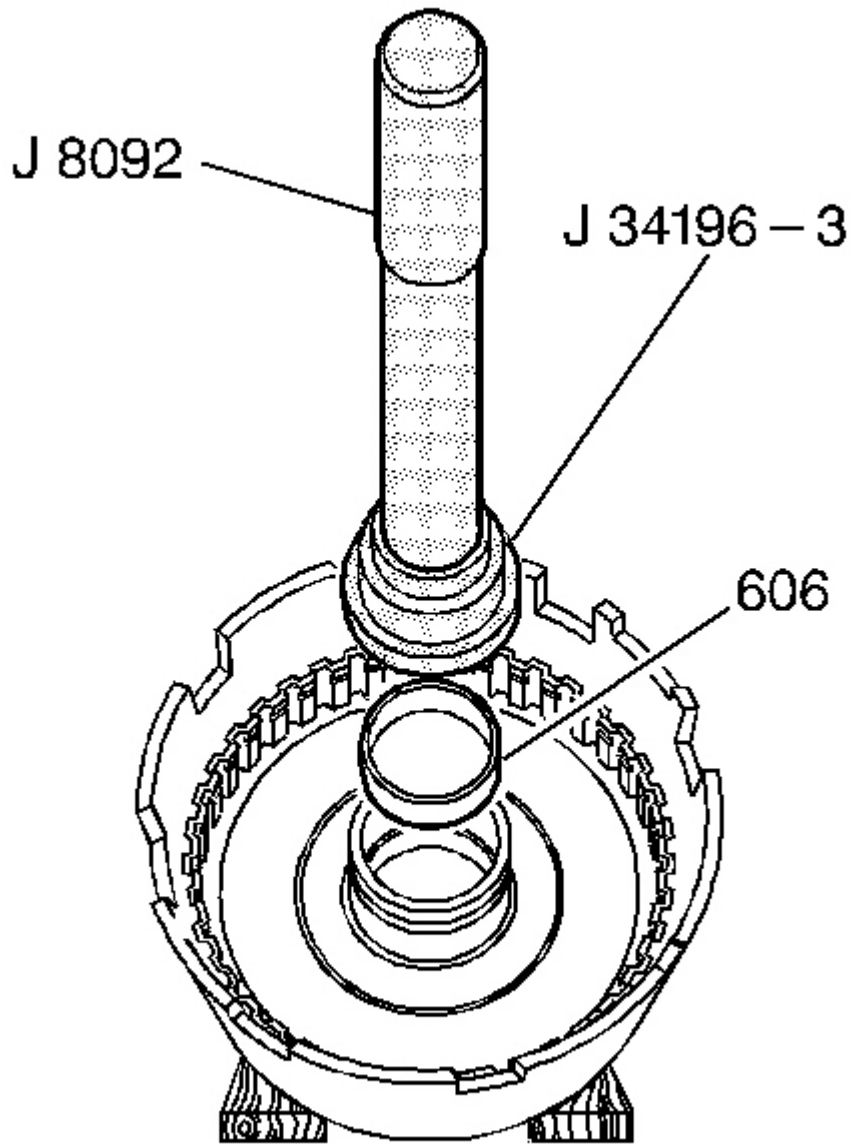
Installing Reverse Input Clutch Rear Bushing
